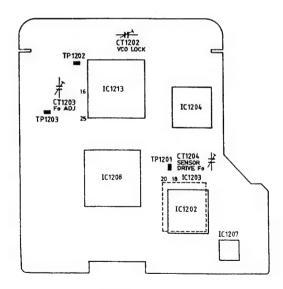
Process (PC) Circuit Board [Side-A]
